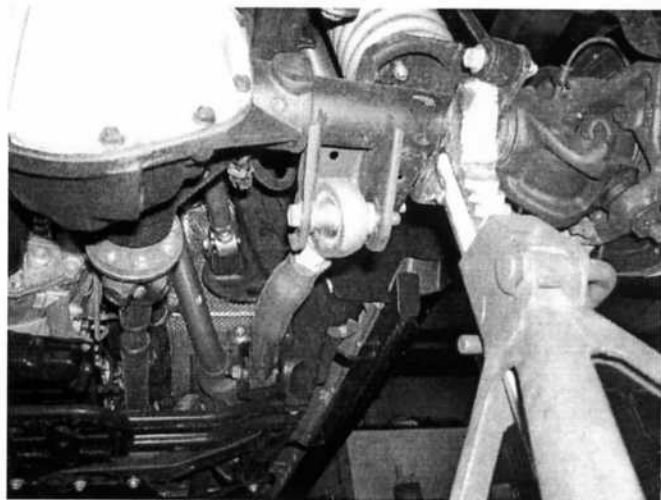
shows the radius of the new arm and proper mounting. (Left/Driver side shown)
